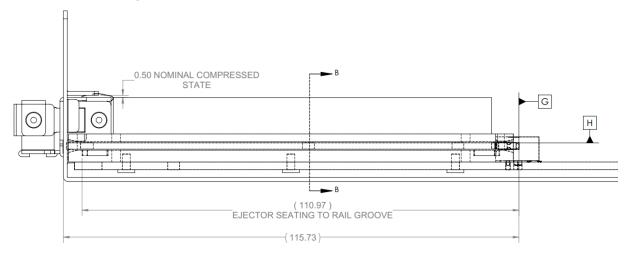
LFF Baseboard Chassis CTF Dimensions (Side View)
